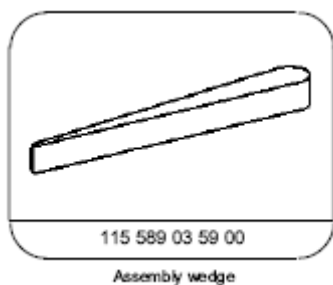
Identifying Assembly Wedge (115 589 03 59 00)
